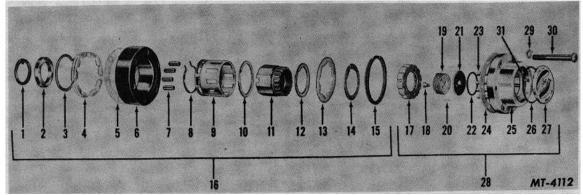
Locking Hub (Lock-O-Matic) (Exploded View)
